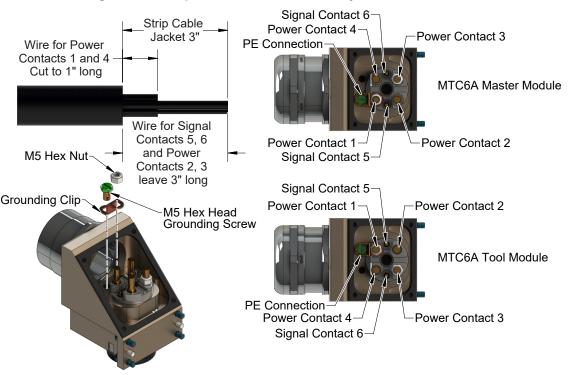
Strip Cable Jacket and Identify Contact Terminals
